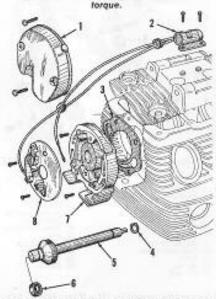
Exploded view of Type II ignition breaker assembly. The automatic ignition advance mechansim is between the valve camshafts. Refer to Fig. HN8-4 for legend.
